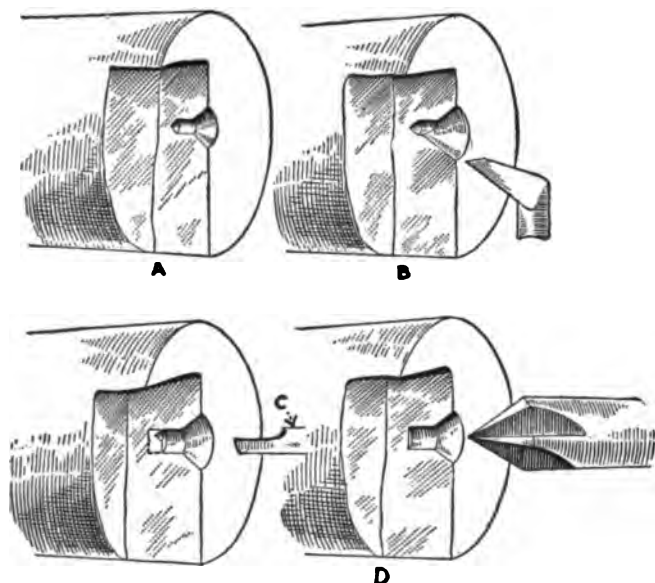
CORRECTING UNTRUE CENTER HOLES
